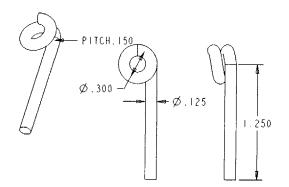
Design for one of the welding rod eyelets used as guides for the Ascending Winch string.
